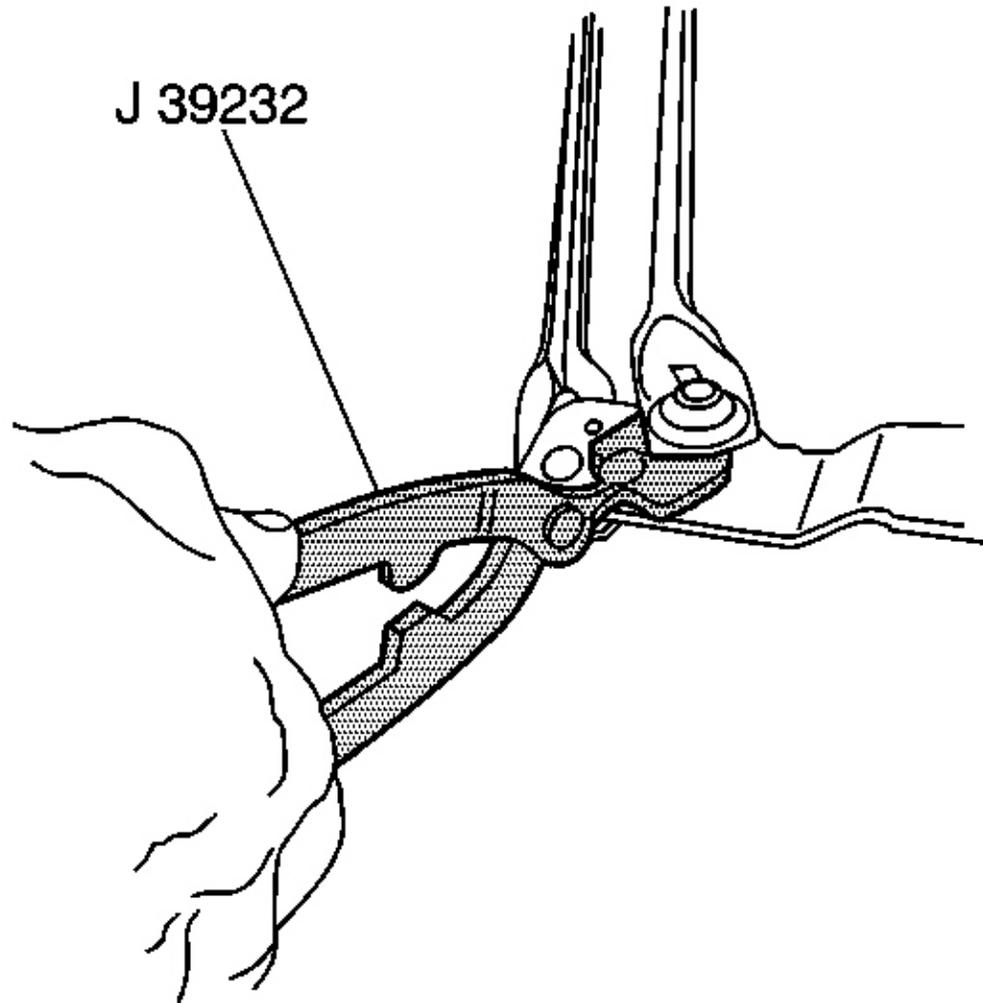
Wiper Transmission To Wiper Motor Crank Arm
